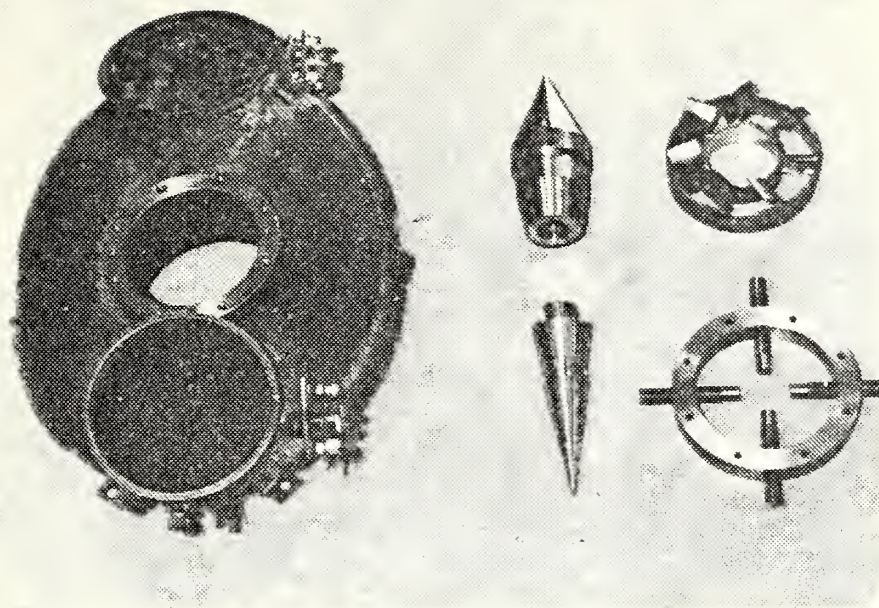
Nozzle Box and Bypass Air Mixing Assembly
